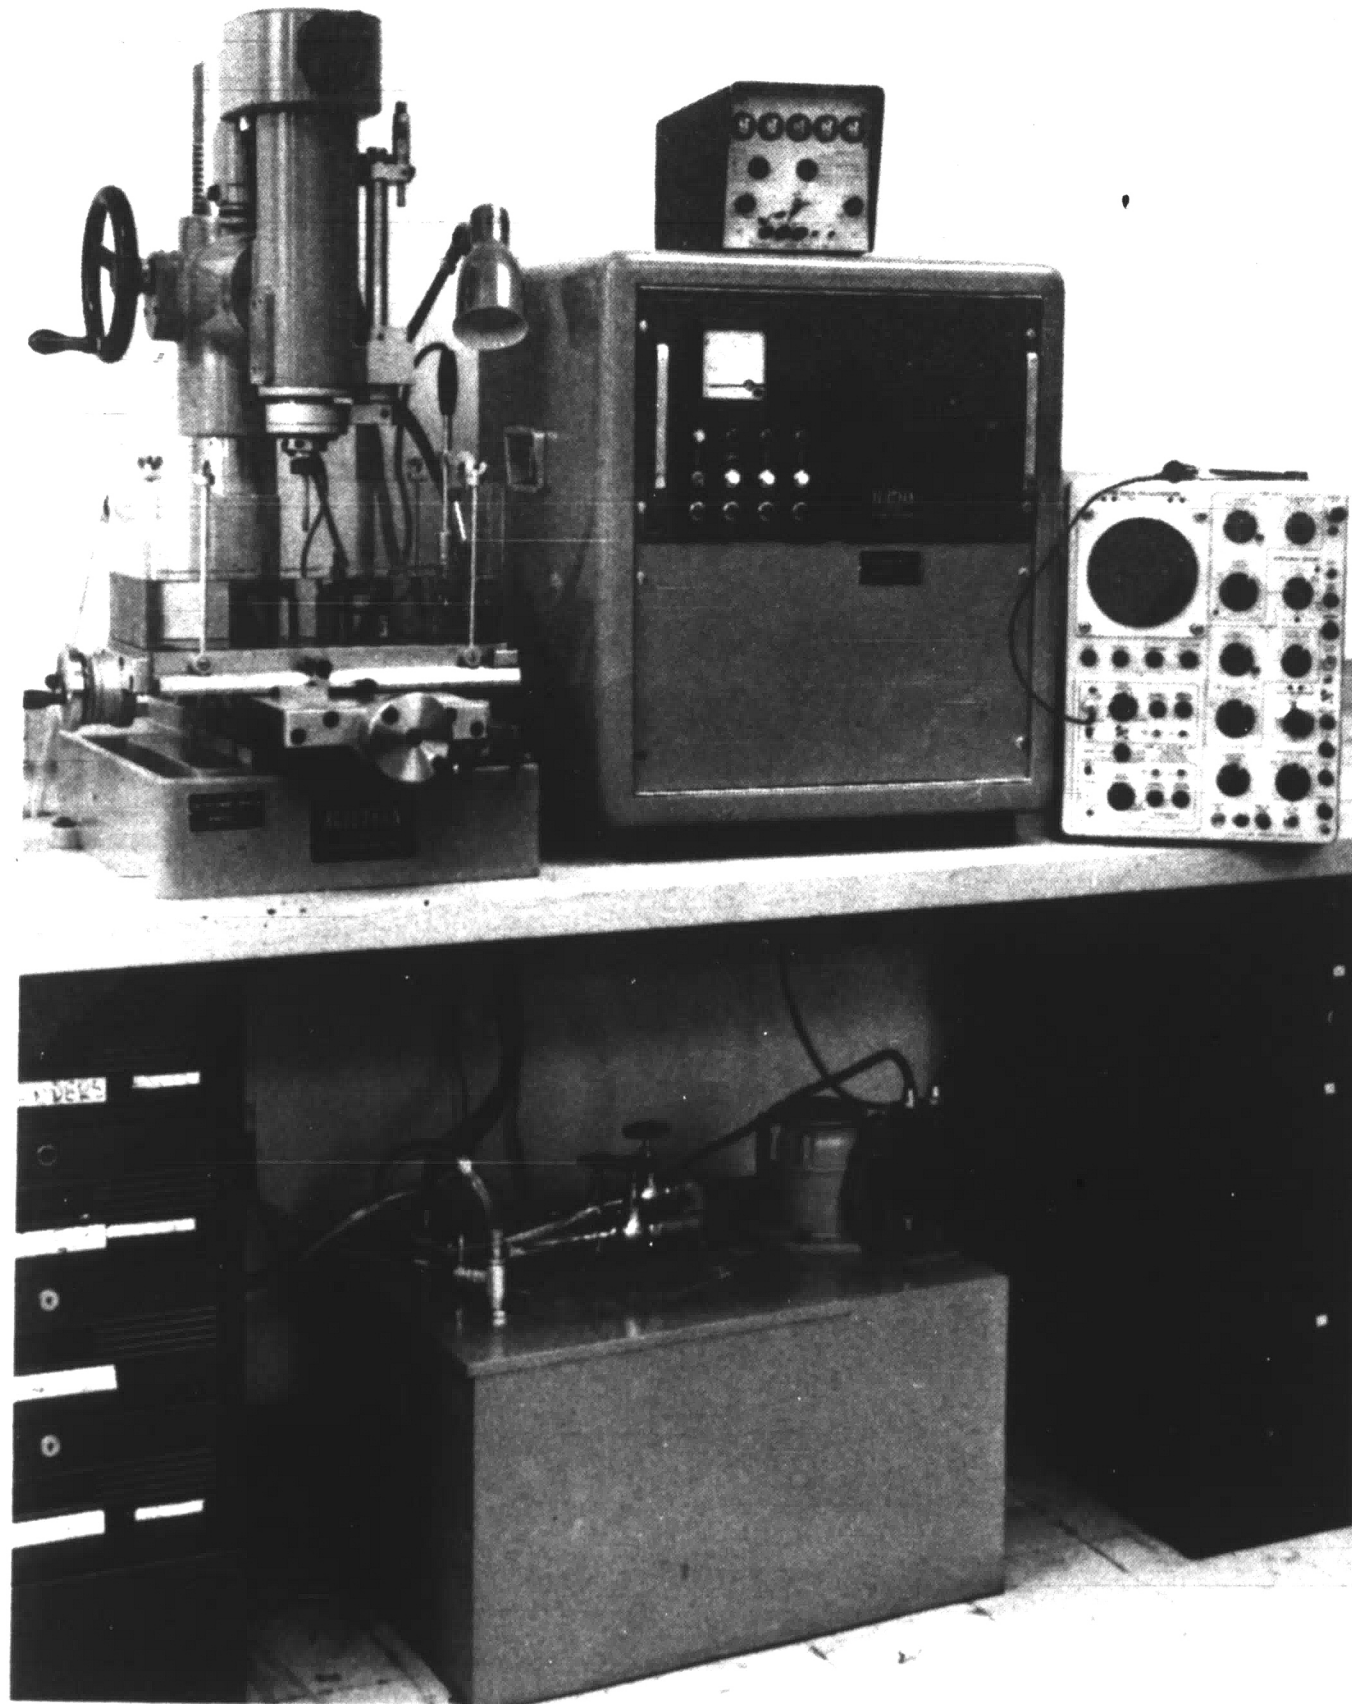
AB 1.5 Agietron EDM machine with oscilloscope and pulse counter installed
